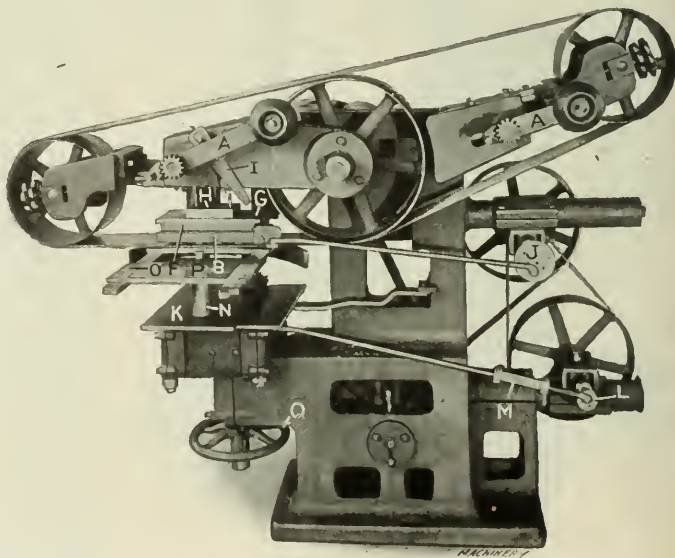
Type F 6- by 14-inch Finishing Machine made by John C. Blevney
